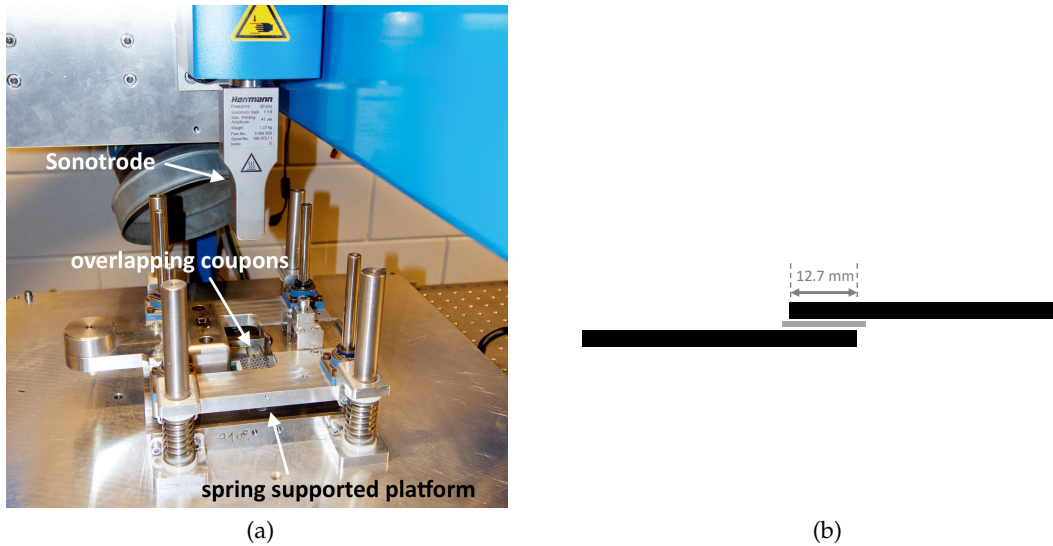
(a) Static ultrasonic welding setup with an in-house built welding jig for single lap shear coupons. (b) Shows how the coupons overlap each other. The grey line represents the energy director in between the black adherends.
